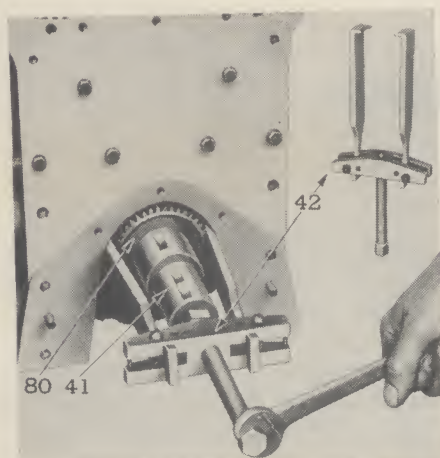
A—A GM engine showing method of removing oil pump drive gear from crankshaft.
